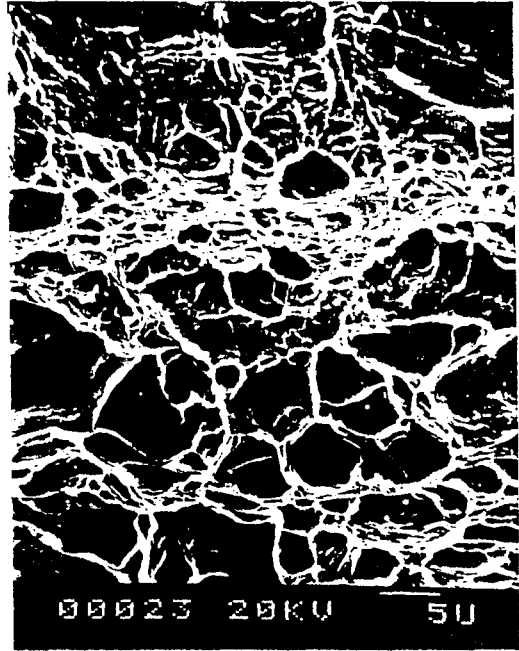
Fracture surfaces of base metal impact specimens at 22°C
